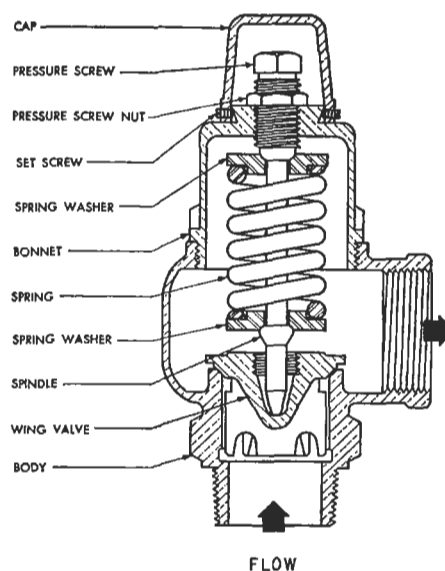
A. Relief valve. Courtesy of Crosby-Ashton Valve Co.
